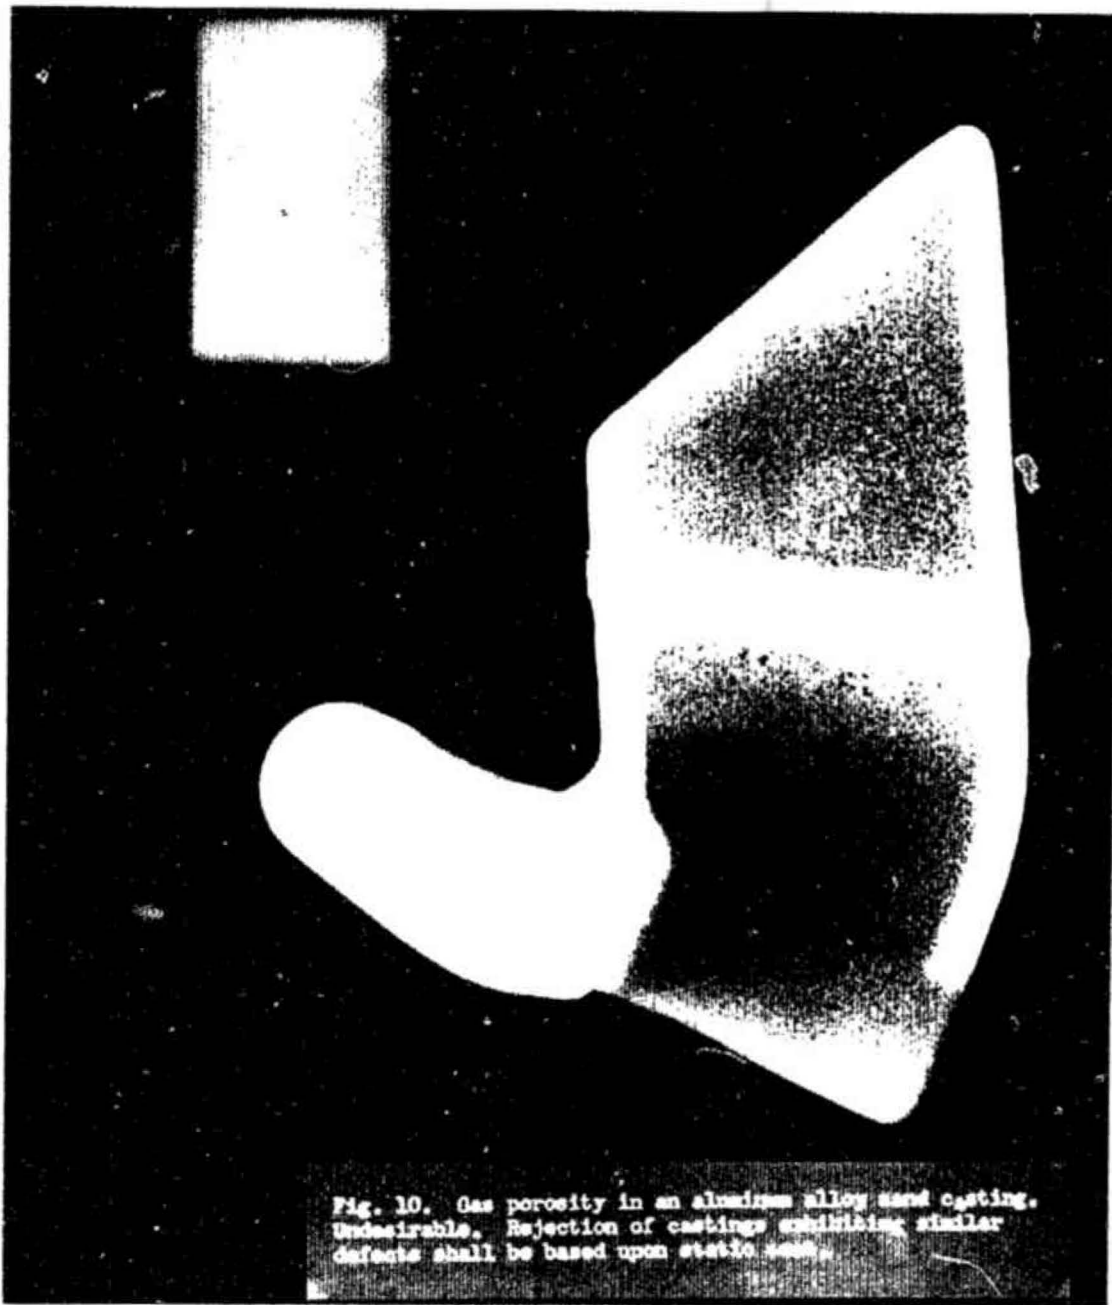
Gas porosity in an aluminum alloy sand casting. Undesirable. Rejection of castings exhibiting similar defects shall be based upon static test.
